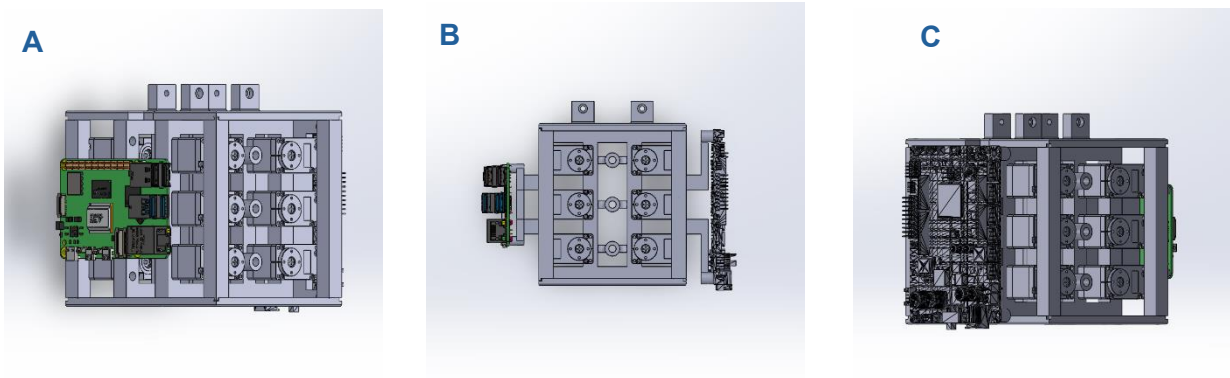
(A,B&C): ($\frac{3}{4}$ left, front and $\frac{3}{4}$ right) view of the hub assembly
